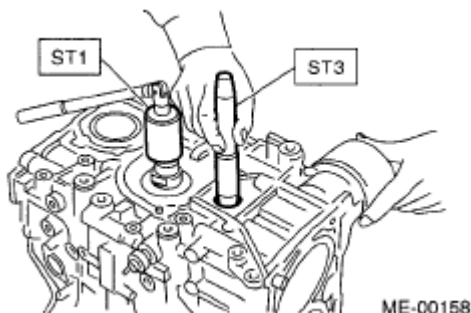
Aligning Piston Pin Hole And Connecting Rod Small End Using Piston Pin Guide 499017100
